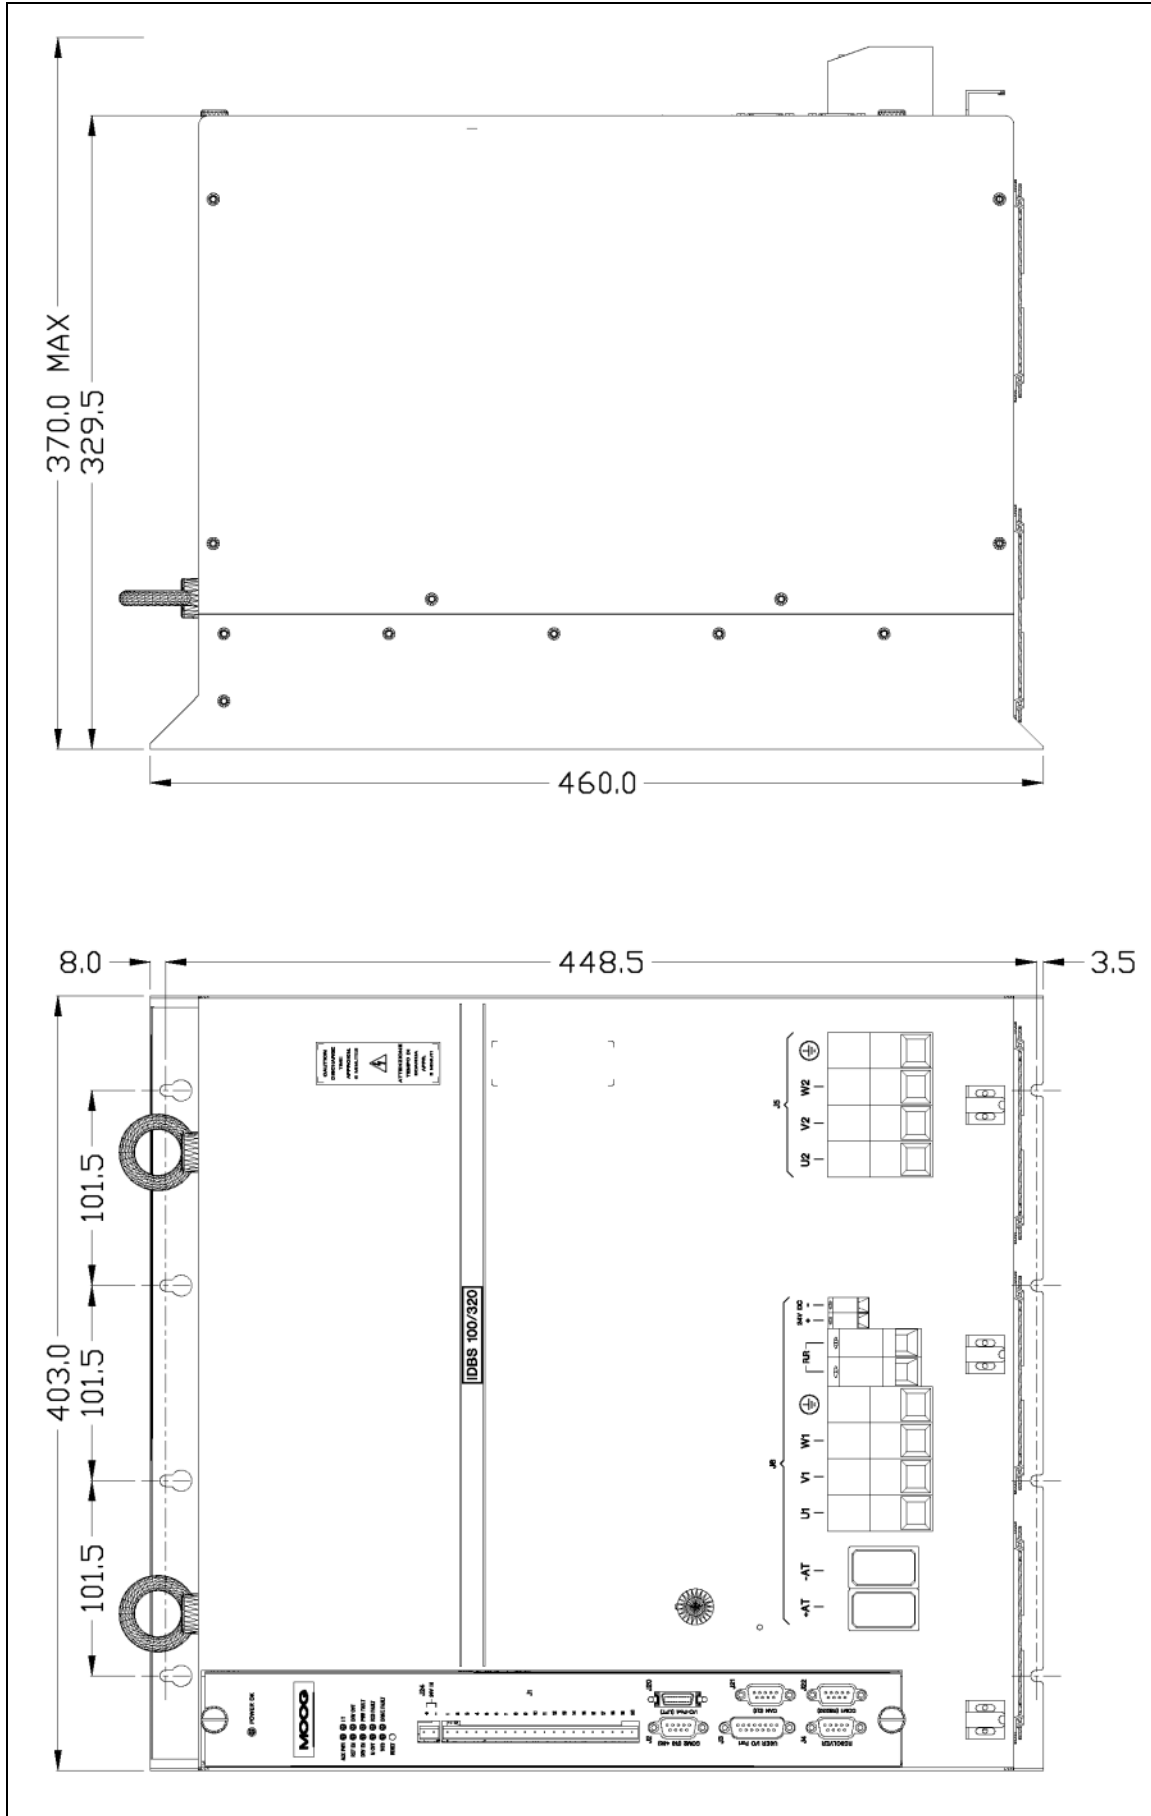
IDBS 180/320 - Dimensions and Drilling Jig (Drill For M5 Screws)
